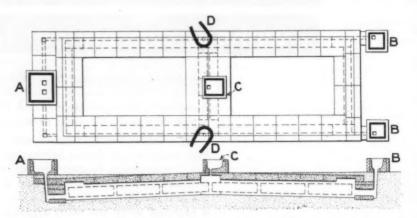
Plan and sectional views of closed mold. A, A are main gates; B, B bull ladle inlets; C, C auxiliary runner on cross member; D, D overflow risers at highest point.
